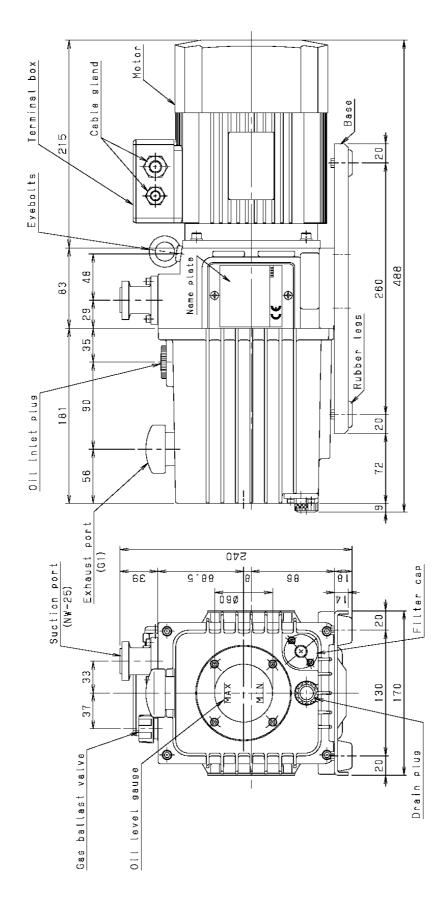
Dimensional drawing of GLD-136A oil sealed rotary vacuum pump
